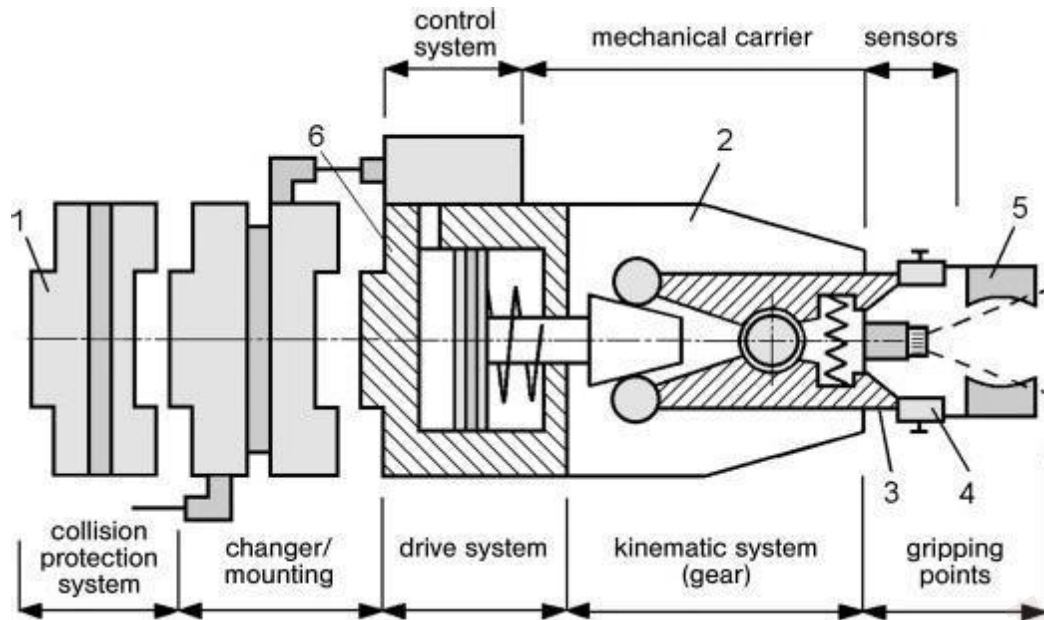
subsystems of a mechanical gripper. 1. remote center compliance, 2. carrier, 3. gripper finger, 4. basic jaw, 6. flange
